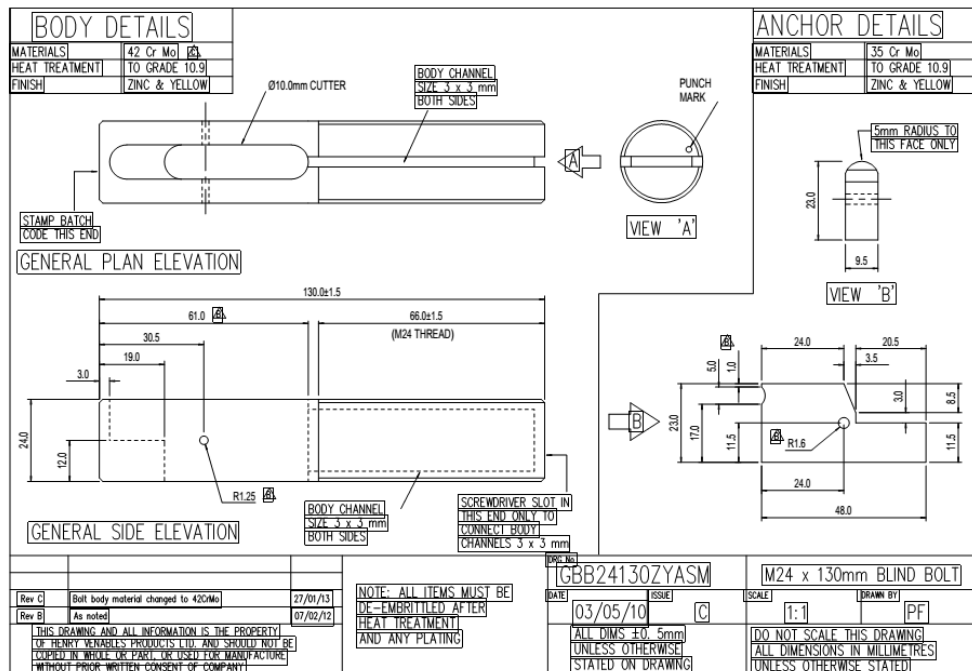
Dimensions and geometric tolerance for blind bolts M24
